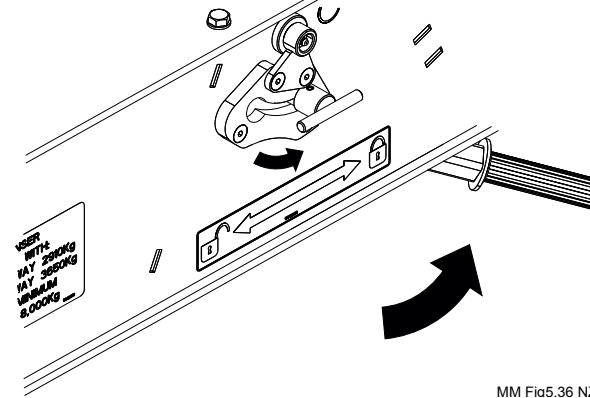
Rotate Dispenser until Spool Shafts Engage with Pockets
